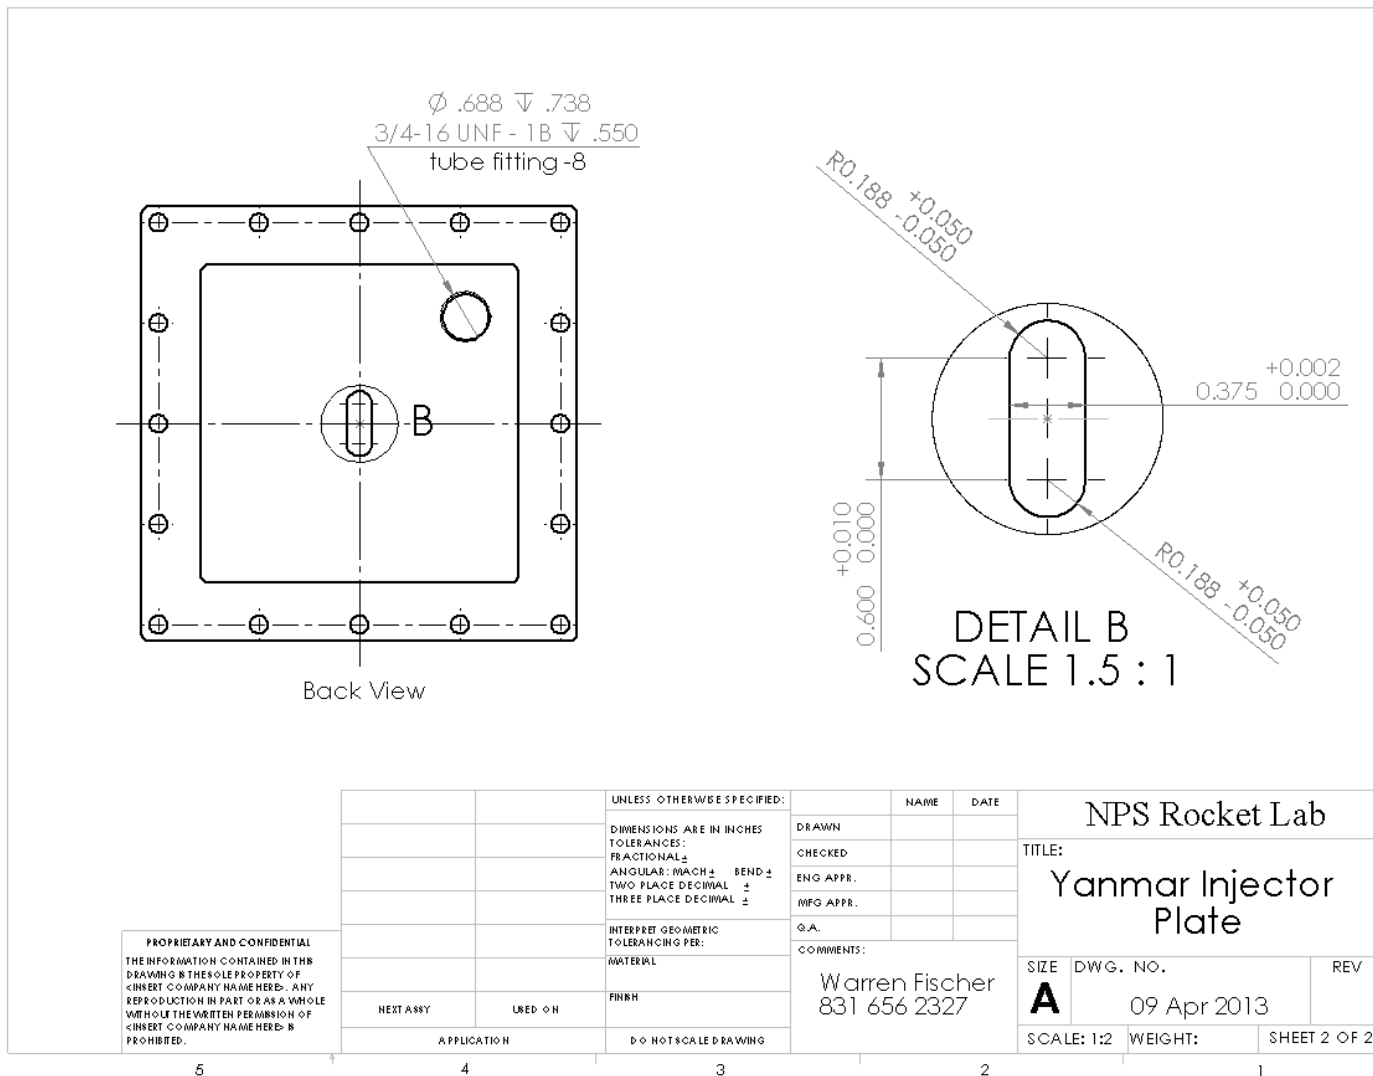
Yanmar Injector Adapter Plate Fabrication Drawing (View 2 of 2)
